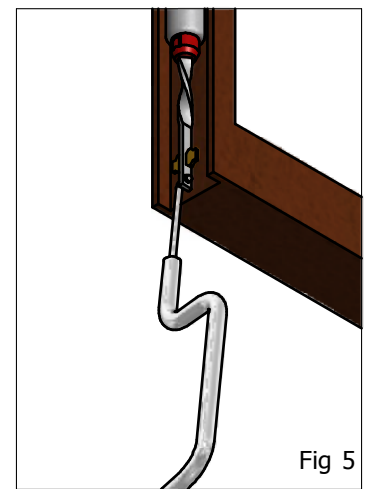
Latch the cross pin into the bracket seat and remove the tension tool. Finally check for a smooth operation of the sash.
